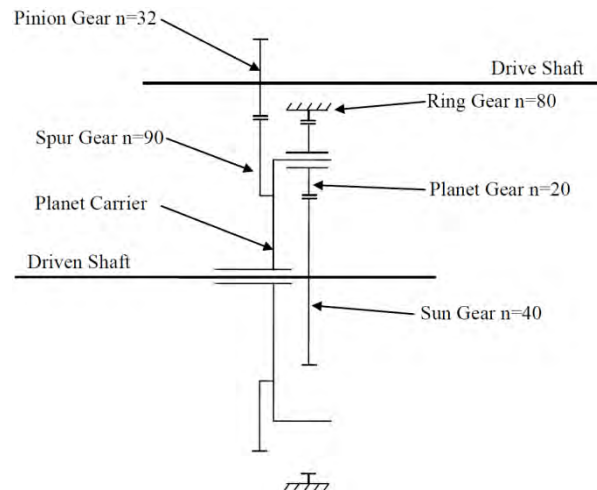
Gear details for the UNSW planetary gearbox test rig (Bligh, 2012)
